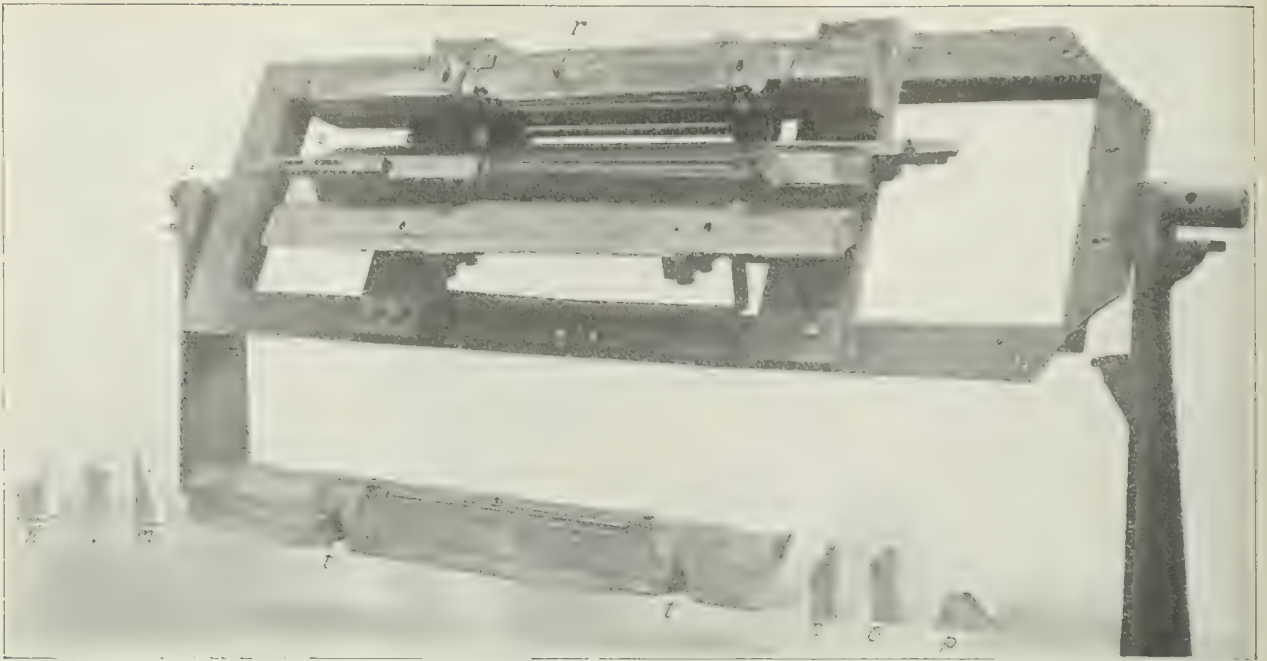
The Mold on Its Frame, with Gates and Vents. Detachable Rake Pieces.
